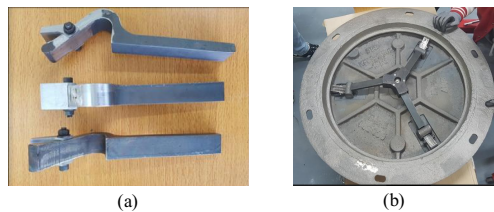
Machined parts and assembled to manhole (a) hook and lifting devices (b) assembly
